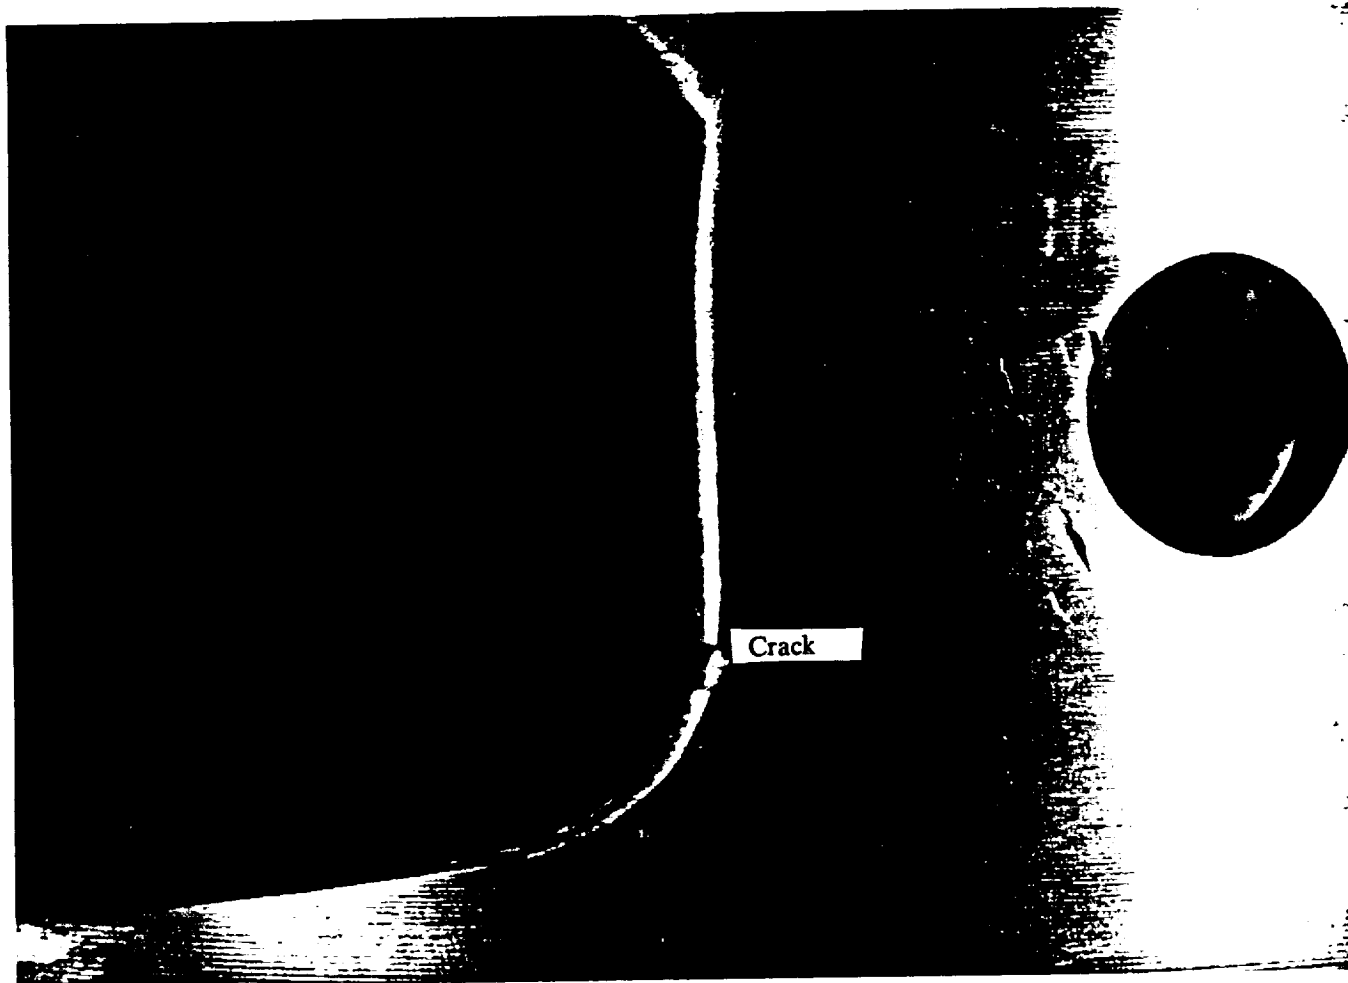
An unprocessed image showing a crack emerging from a machine part.
